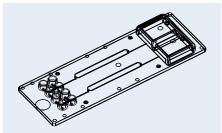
Schematic drawing of a straight channel chip with waste chamber 0272 to be equipped with double-sided adhesive tape
